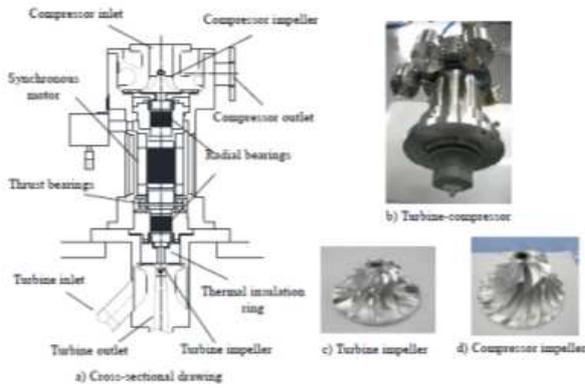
Cross-sectional drawing and photograph of the turbine-compressor
